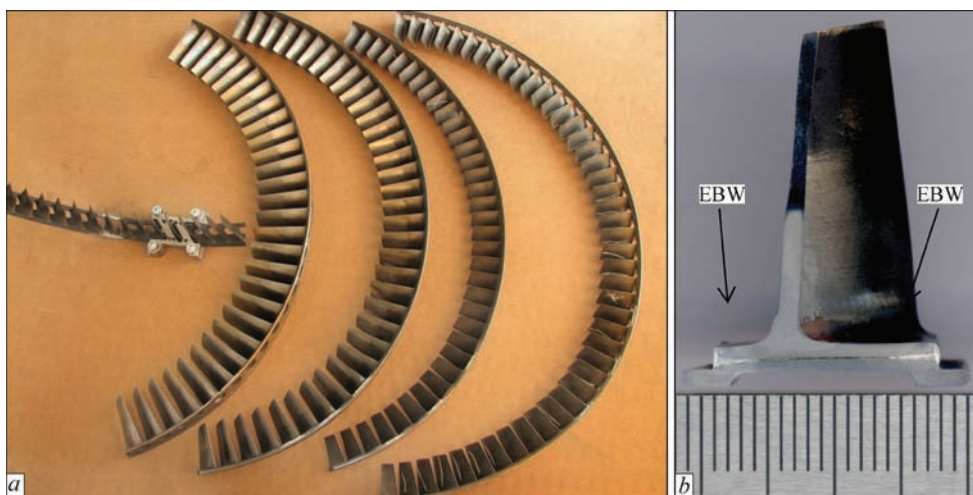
Scheme of assembly of the blade-donor with a semi-ring (a) and the macrosection of the joint (b) of the high-pressure compressor stator guiding device
